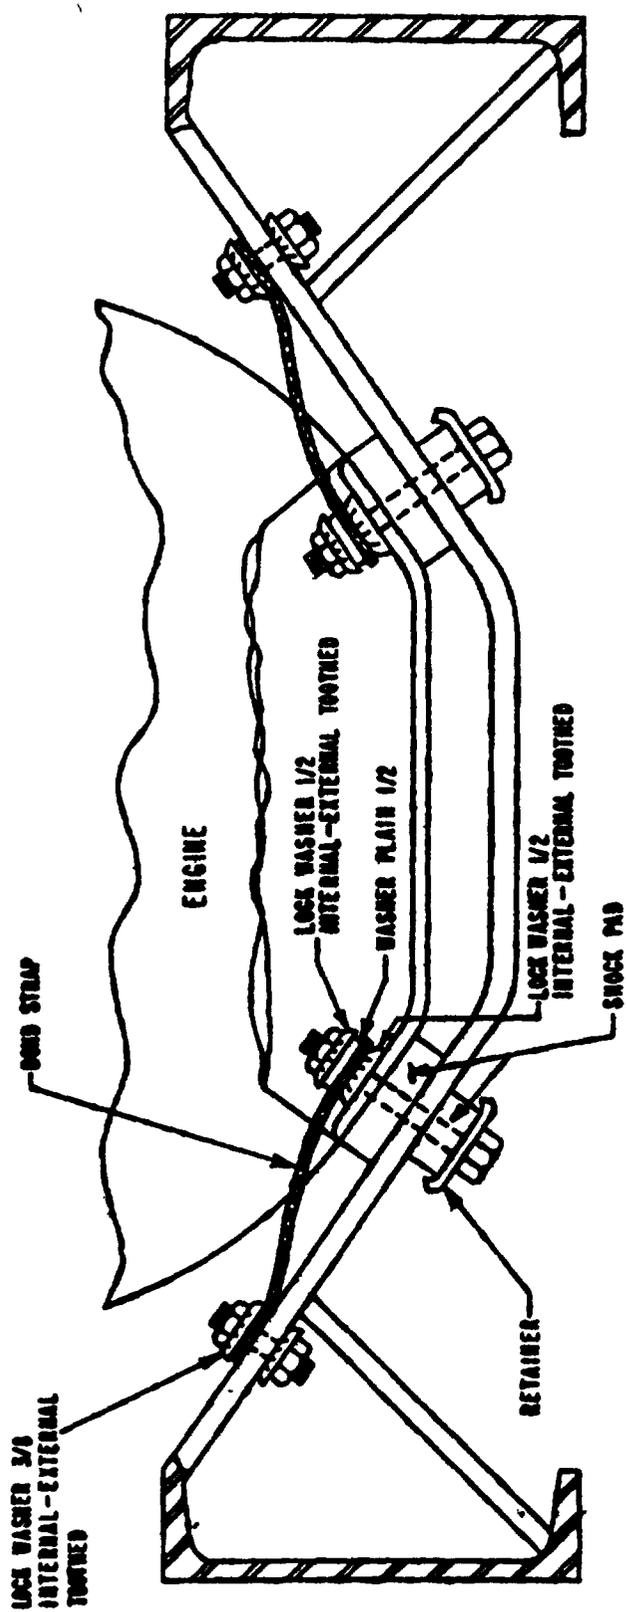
BONDED ENGINE SHOCK MOUNT - REAR
